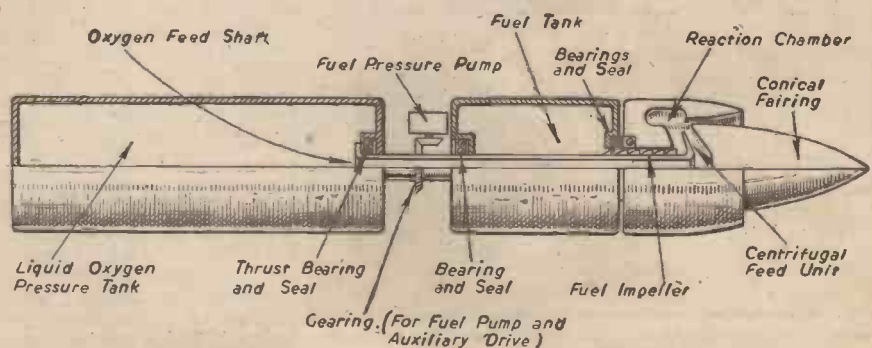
Sectional view giving details of the centrifugal fuel injector and oxygen and fuel tanks.
